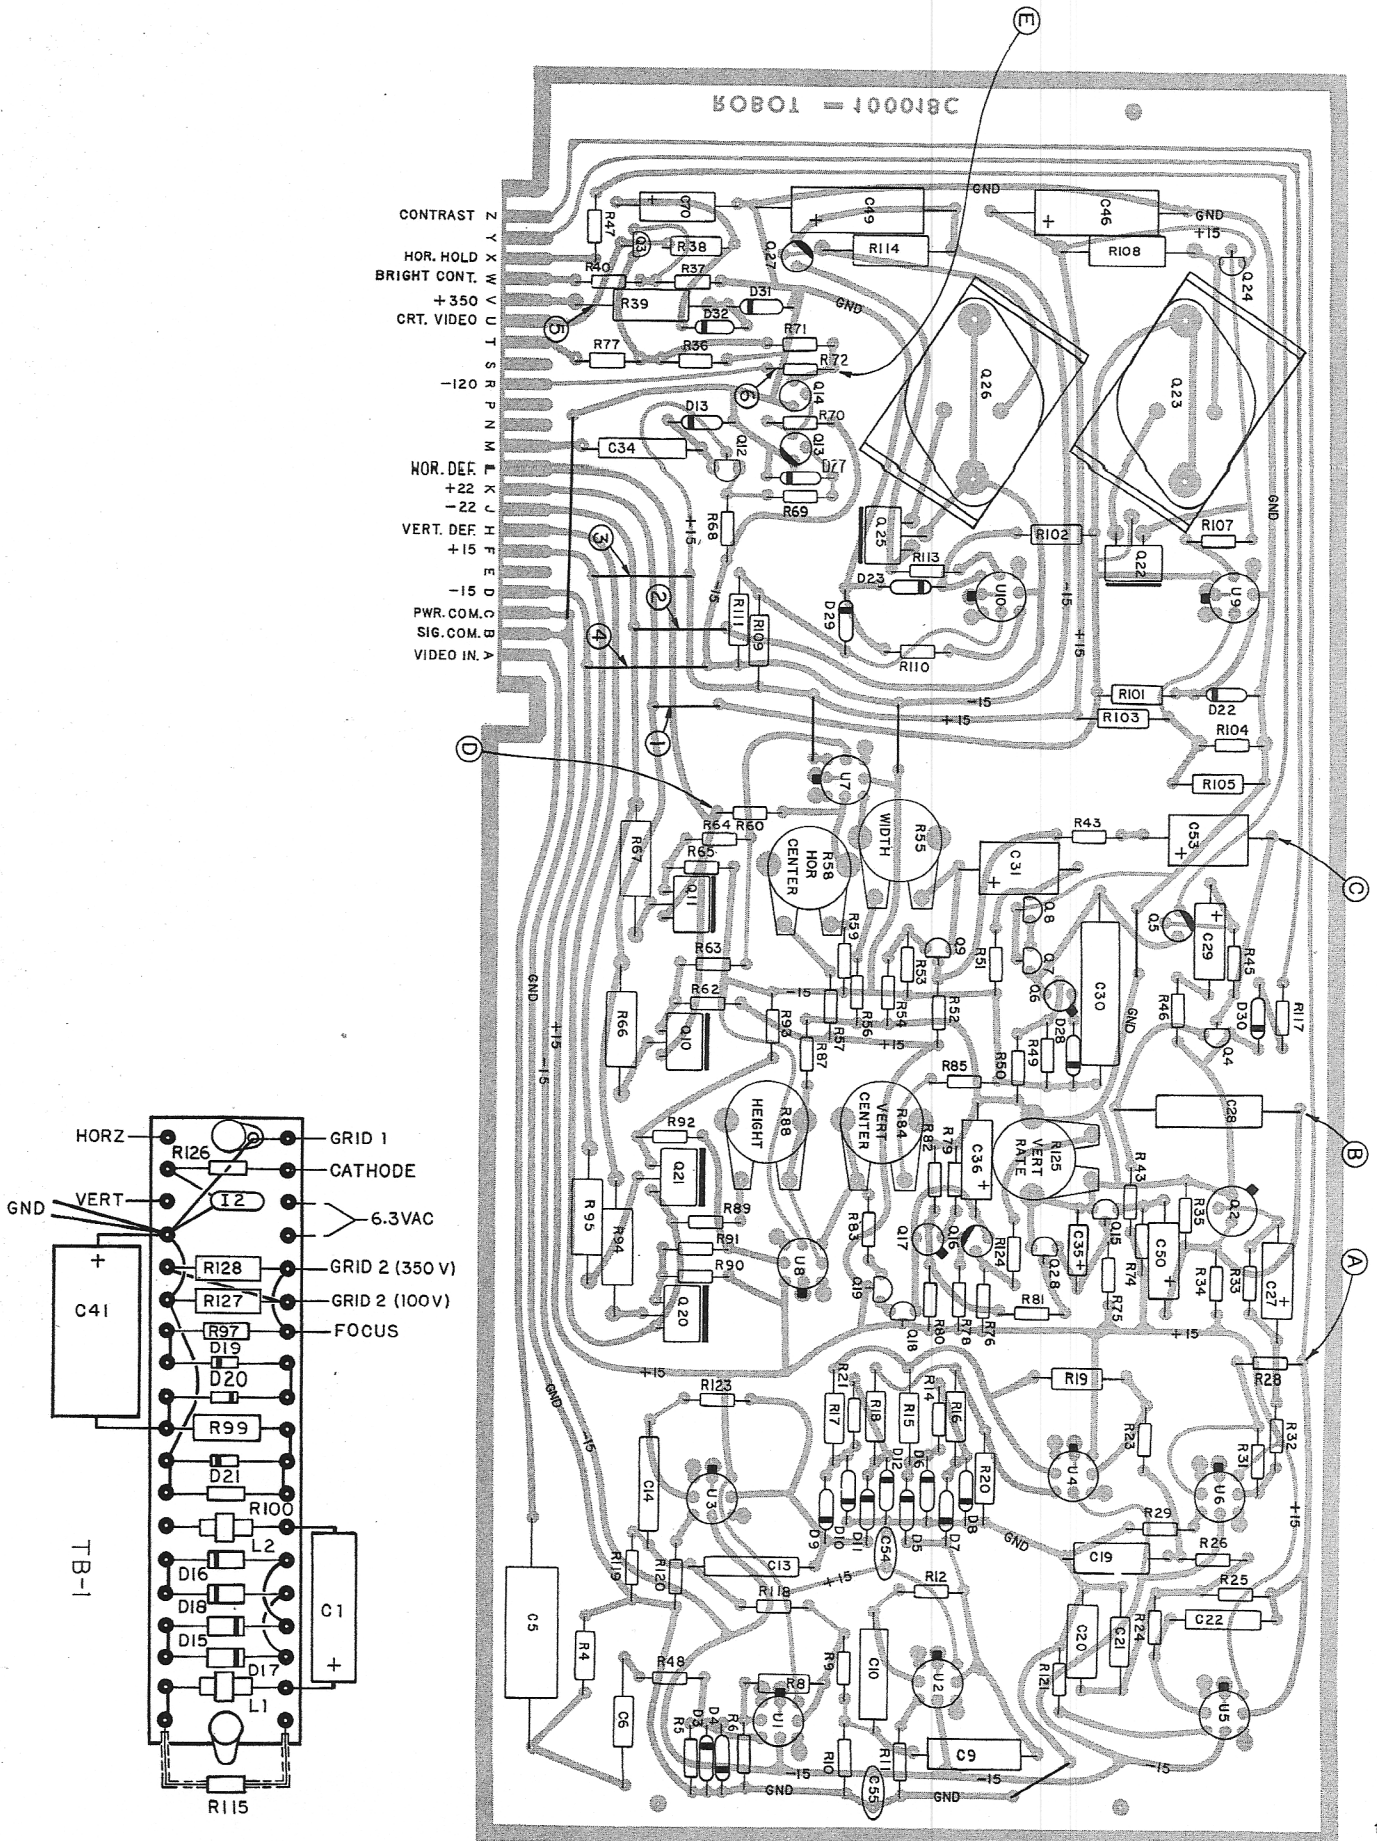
CIRCUIT BOARD COMPONENT LOCATION
